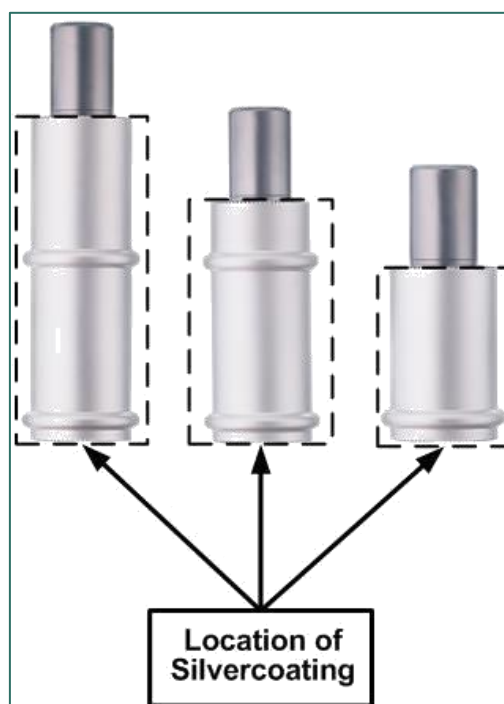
MUTARS® EXTENSION PIECE – LOCATION OF SILVER COATING
